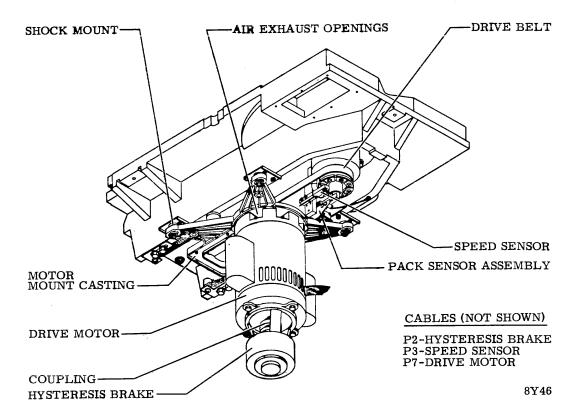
Drive Motor Replacement S/C 12 & Above
